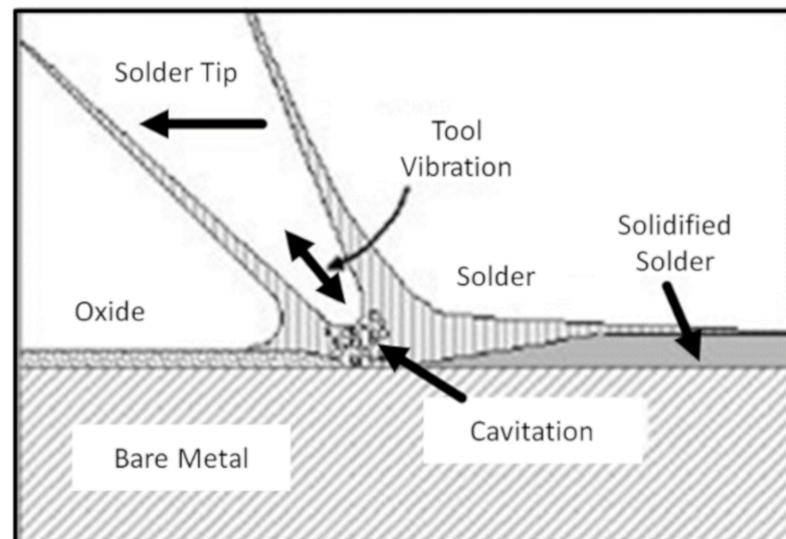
Schematic illustration of the cavitation mechanism in ultrasonic soldering [26].
